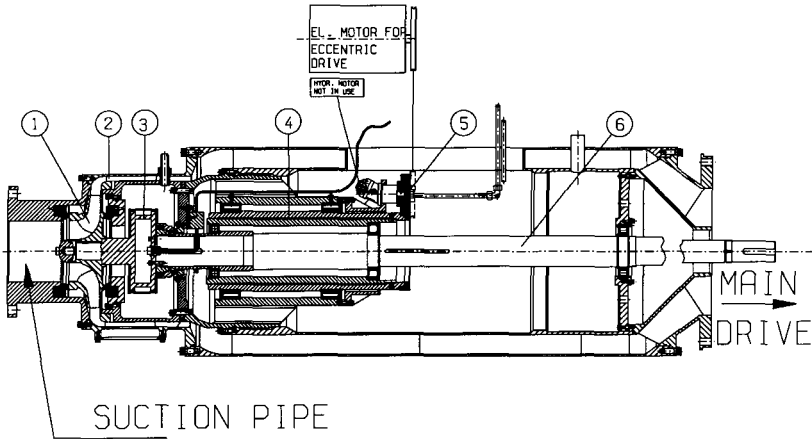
Forced whirling test rig for study of impeller/diffuser interaction forces (3D impeller/axial diffuser). 1. Impeller, 2. Diffuser guide vanes, 3. Dynamometer, 4. Eccentric sleeves, 5. Eccentric drive, 6. Main shaft
